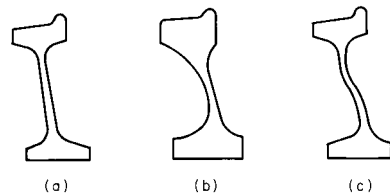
Wheel-plate designs. (a) Flat plate; (b) parabolic plate; (c) S-curved plate.
